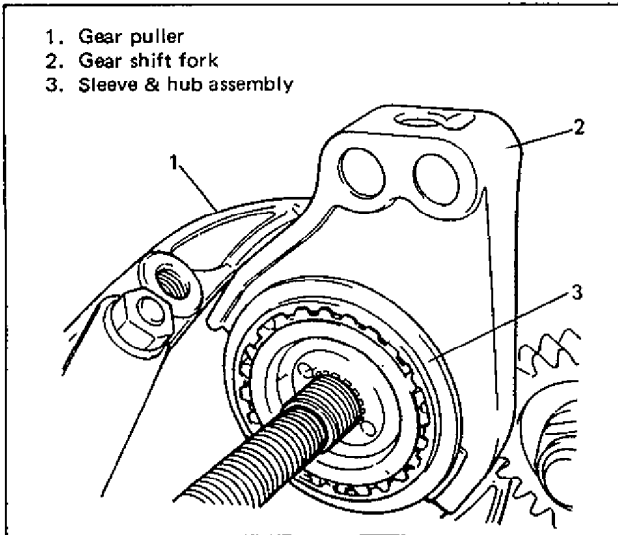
A-26 Removing Sleeve &amp; Hub Assembly
